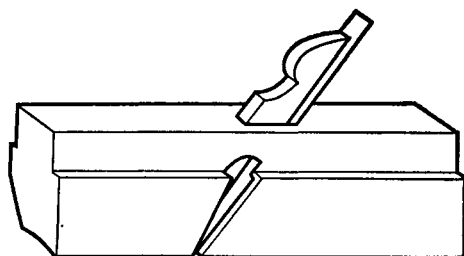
Moulding planes may have various profiles and are used to shape the edges of timber to form mouldings.
